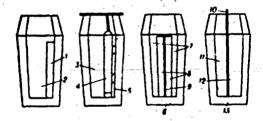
Typical arrangements for casting laminated ingot: 1) soft steel plate; 2) filler of hard steel (hard layer); 3) filler of hard steel; 4) soft steel plate; 5) layer to improve thermal regime (removed later); 6) double casting of two two-layer ingots; 7) filler of hard steel (hard layer); 8) soft steel plate; 9) ceramic interlayer preventing welding of ingots; 10) soft sheet-steel barrier; 11) pouring of first layer; 12) pouring of second layer; 13) sequential layer-by-layer casting.
